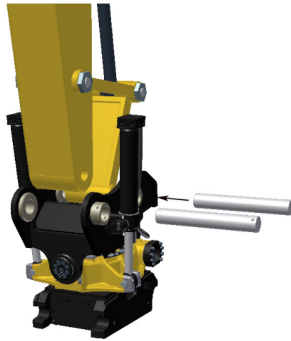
Example of Gamma's DTI, an exploded view of a cylinder
